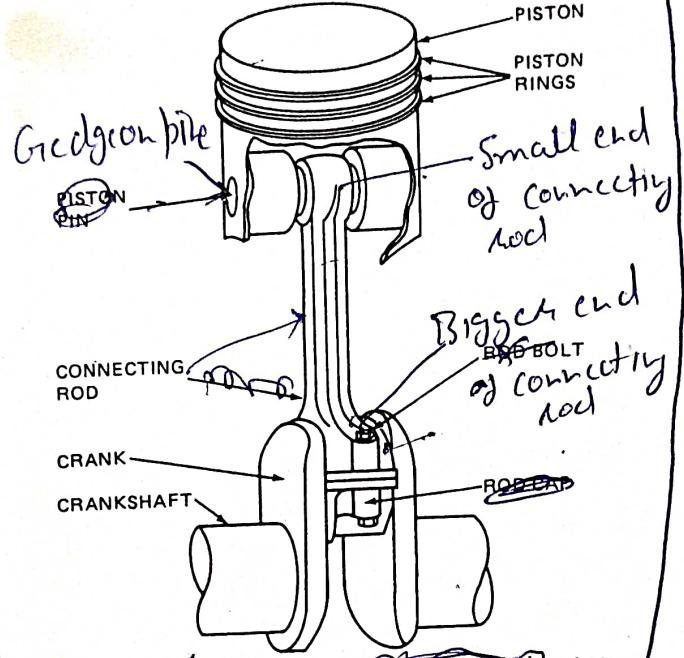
Piston-and-connecting-rod assembly attached to a connecting-rod bearing on the crankshaft. The piston is partly cut away to show how the piston pin attaches the piston to the connecting rod.
